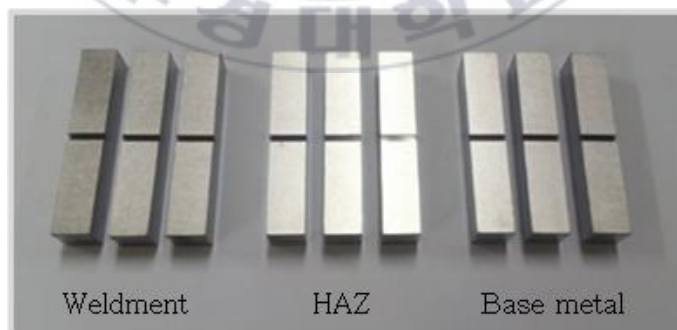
Specimen shape for charpy V-notch impact test (Notch 2mm)
